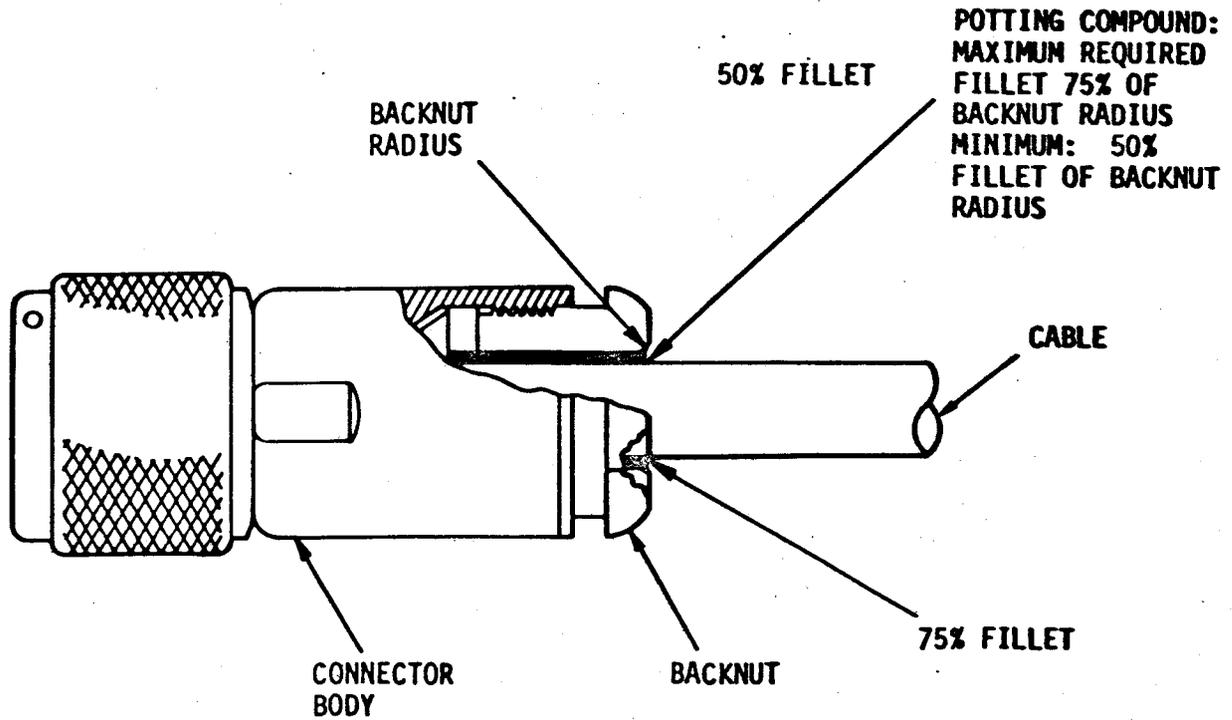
Connector Potting Compound Fillet, Dimensional Requirements
